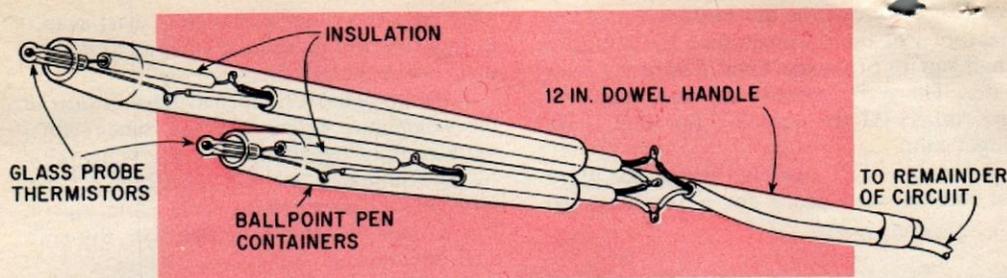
Tip of thermistor protrudes slightly out of pen container. After thermistors are wired, epoxy them into container. Keep epoxy off tip.
